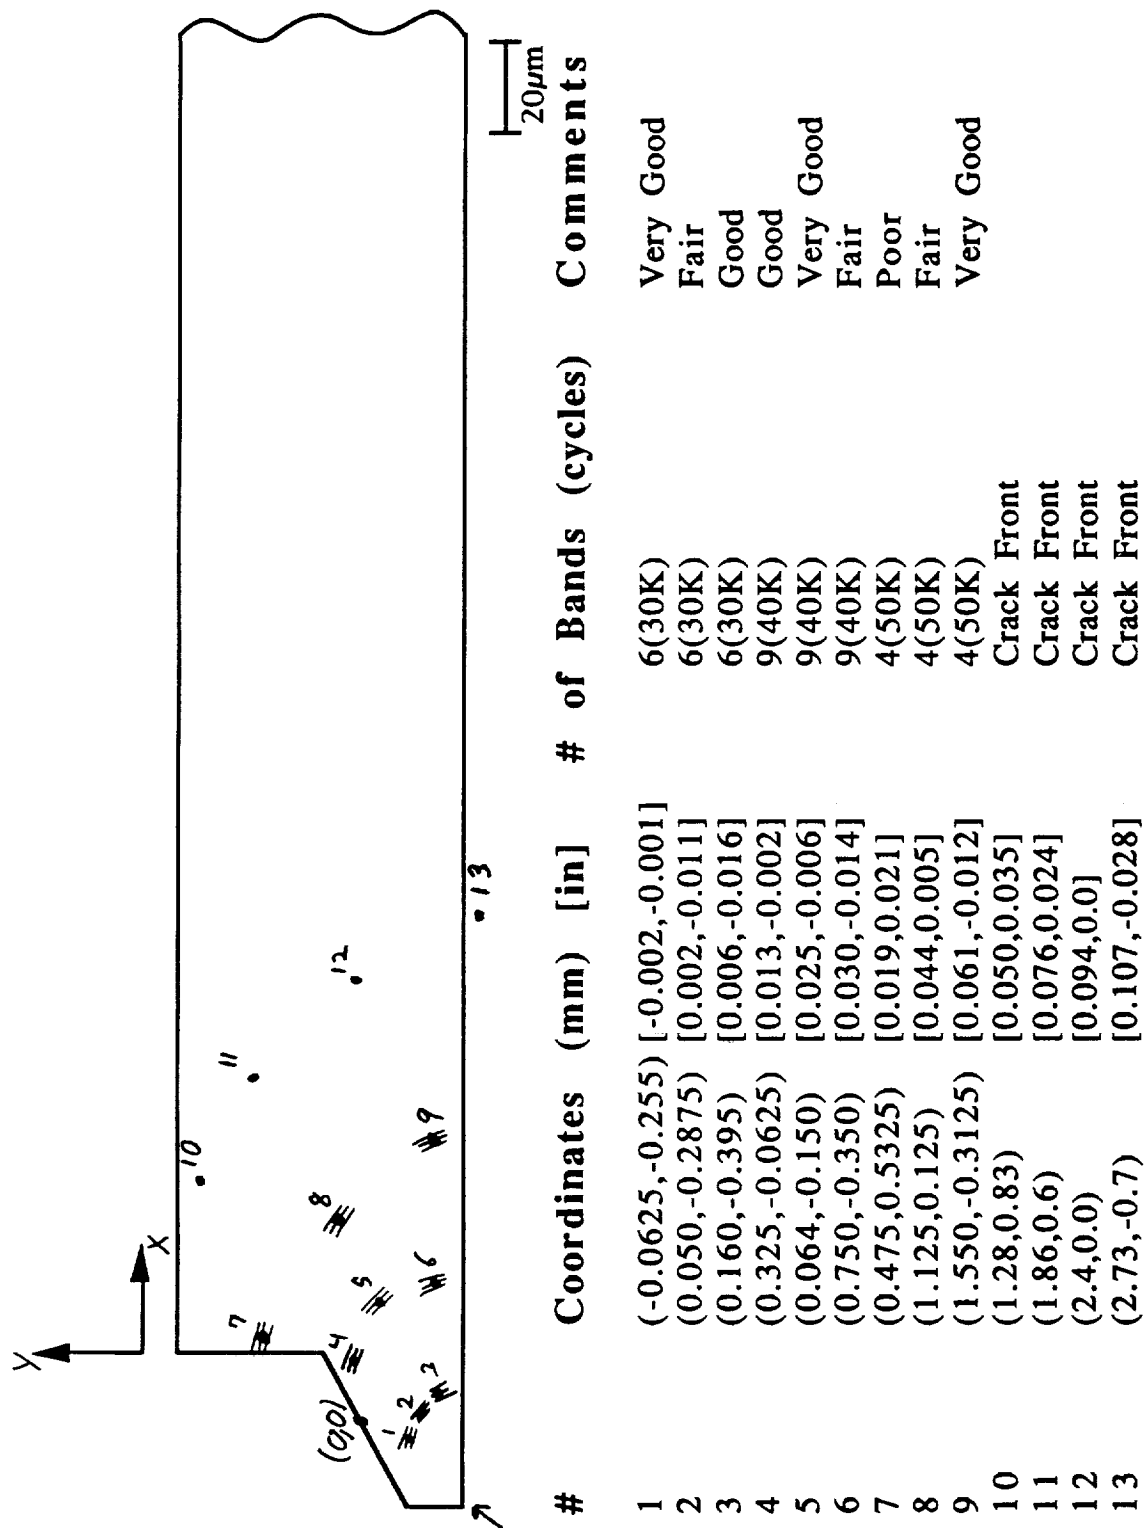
Rivet hole schematic: Upper rivet row, hole number 4J14, fatigue crack growth is in the forward direction.
